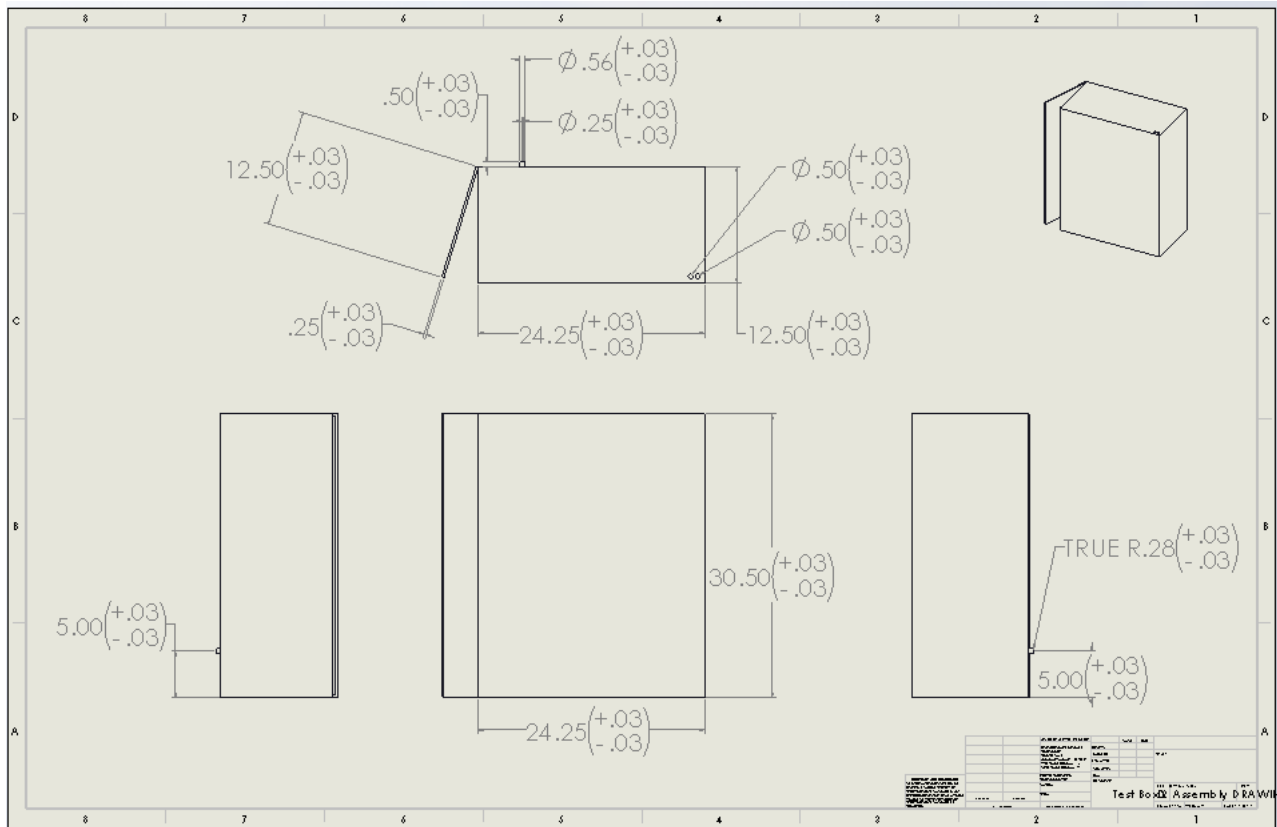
SOLIDWORKS DRAWING OF THE TEST BOX WITH TOLERANCE
